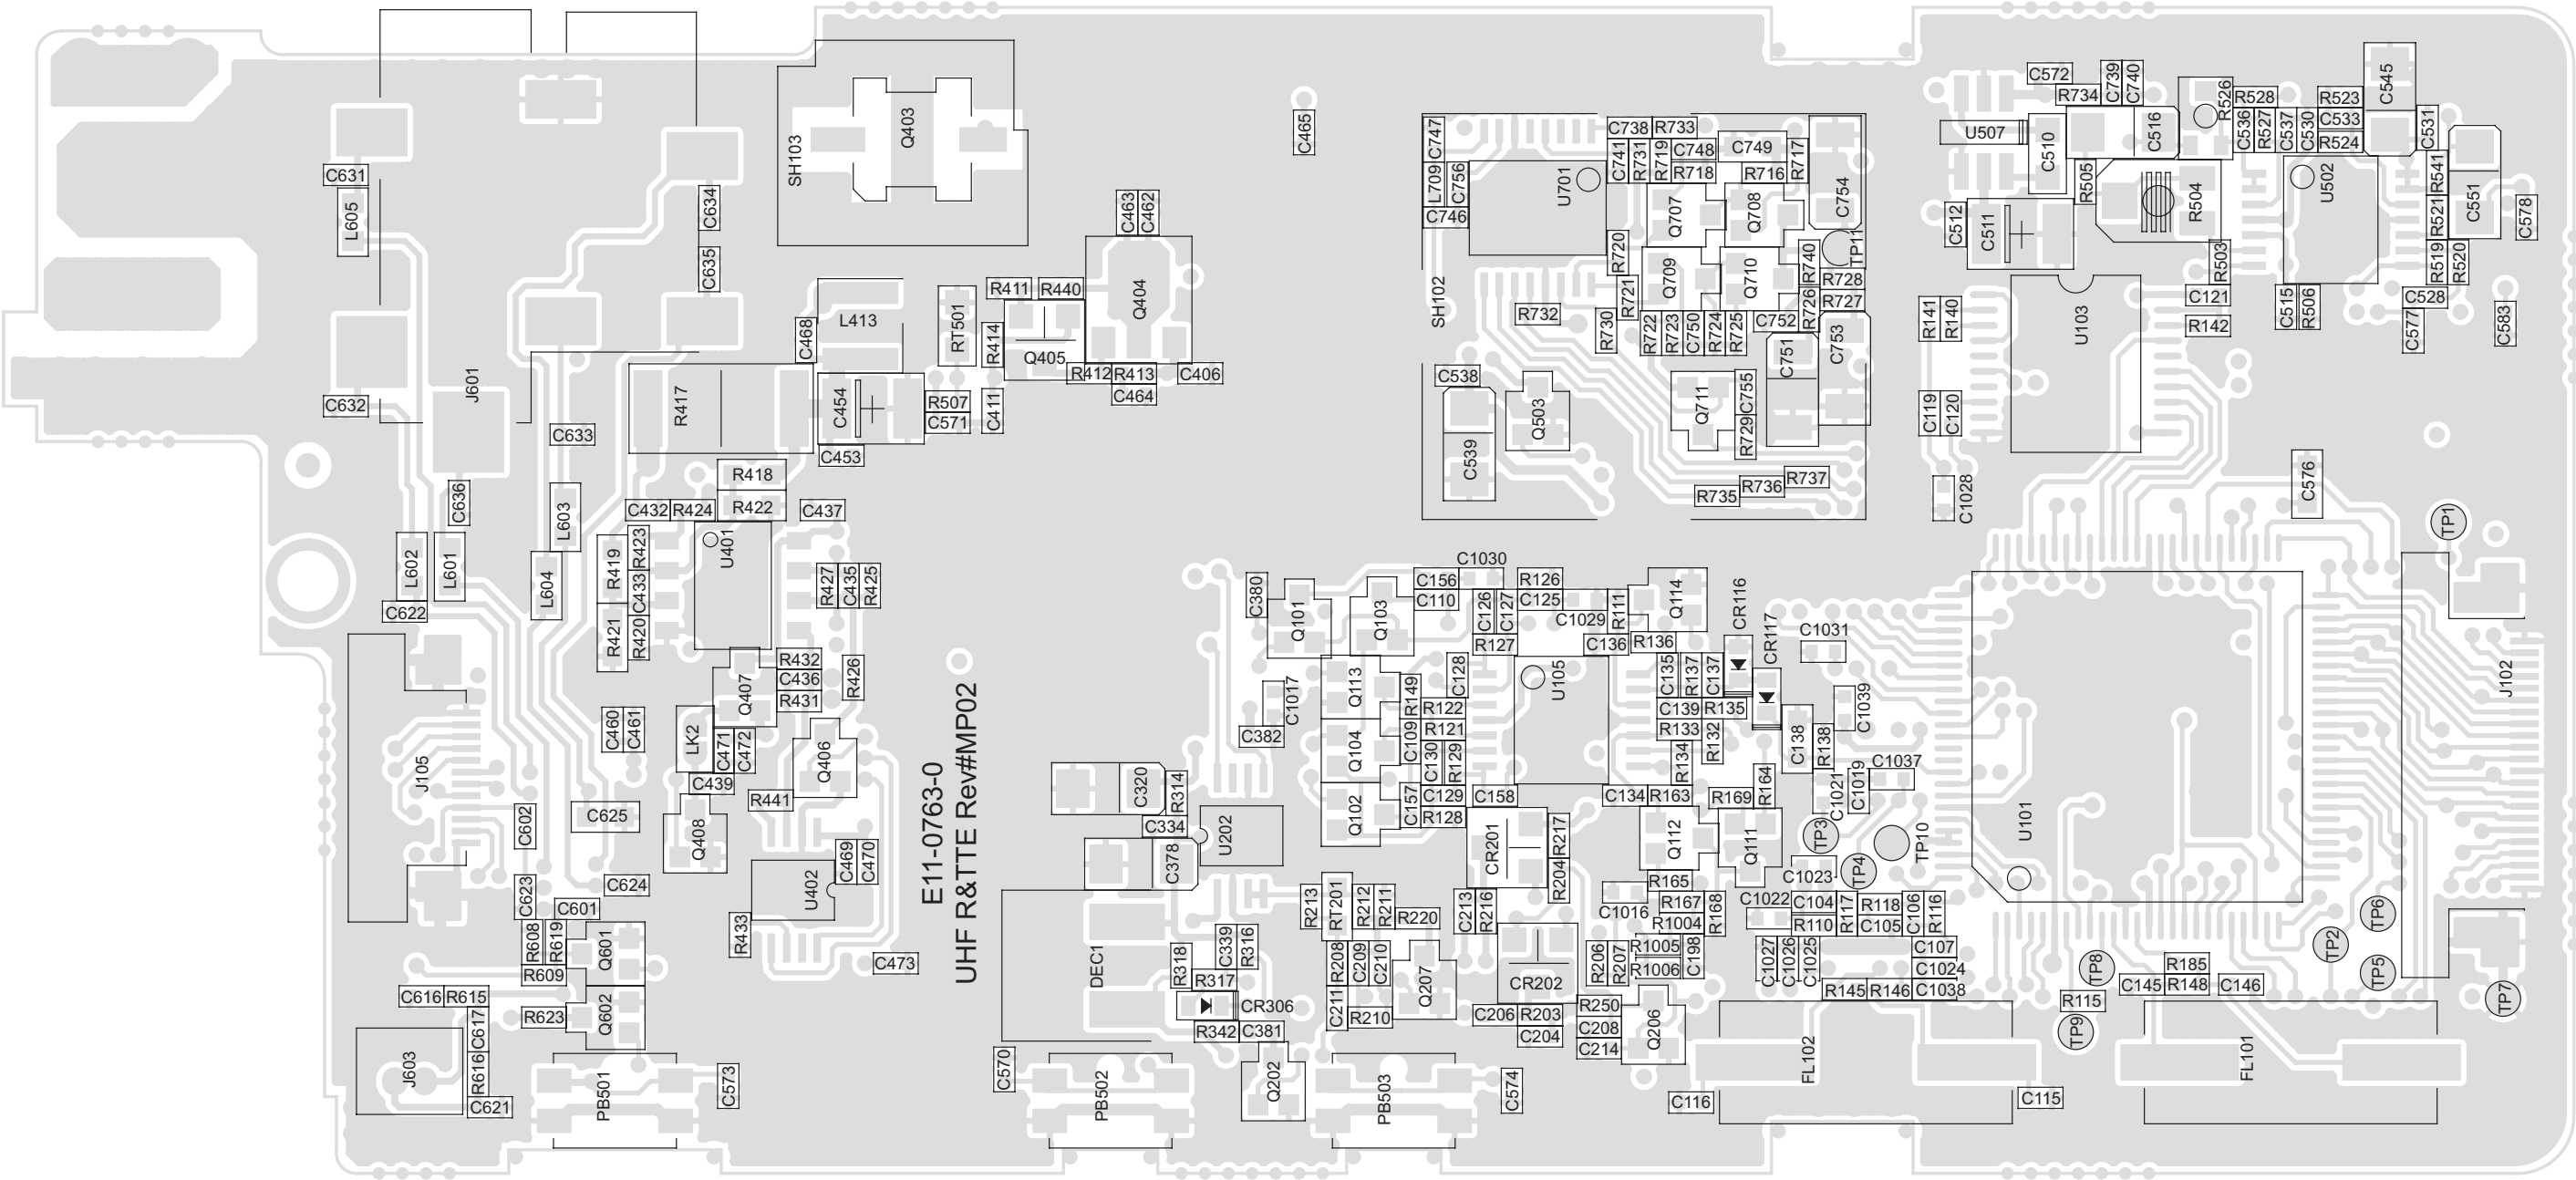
UHF2 R&TTE (435–470 MHz) Mainboard Top Side: PCB No. E11-0763-0
